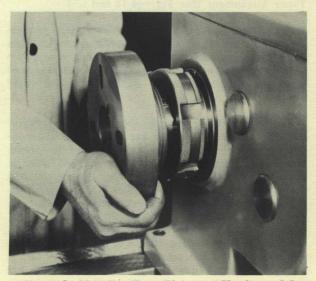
Mounting Face Plates or Chucks on LO Spindle
